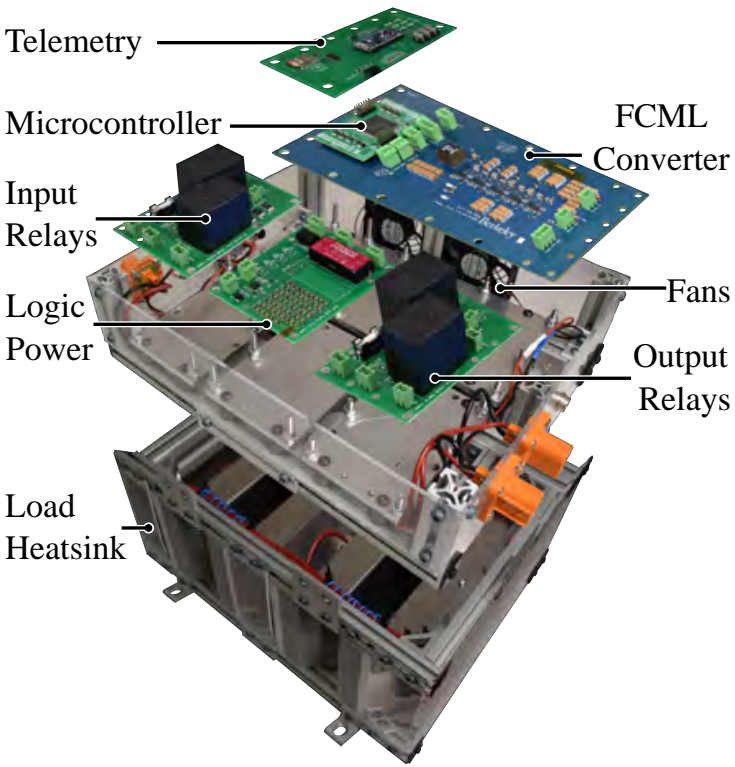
Exploded view of system, highlighting key components and printed circuit boards.
